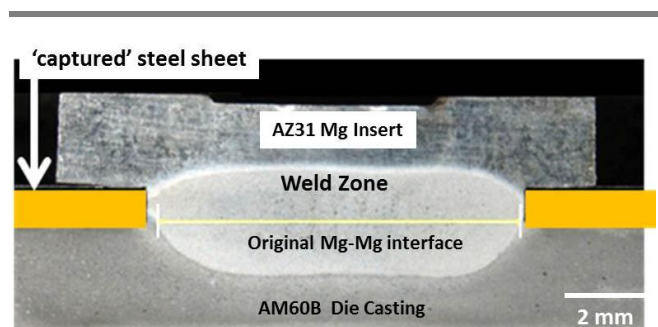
Cross-sectional view of an “adaptable insert” joint affixing a coated HSLA EG steel panel to an AM60B Mg die casting using an AZ31 Mg insert.
